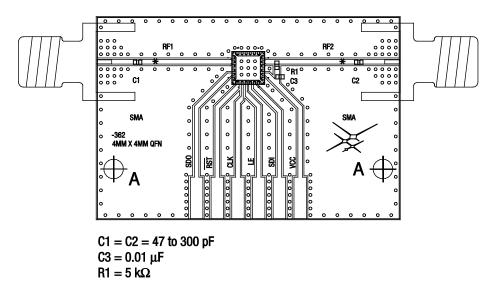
SKY12349-362LF Evaluation Board Assembly Diagram
